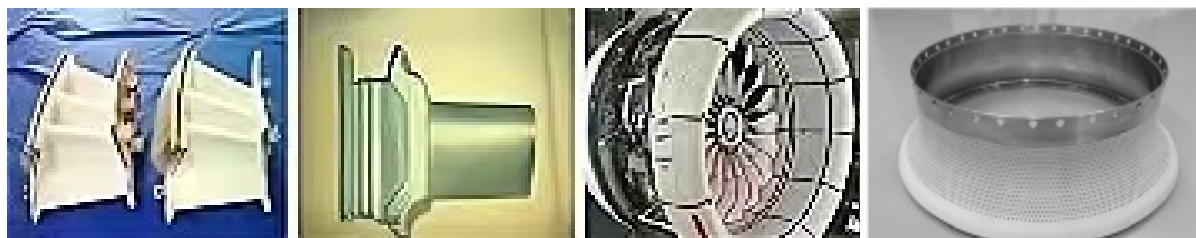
Engine hot end pieces coated with thermal barrier coating [4] [5]
